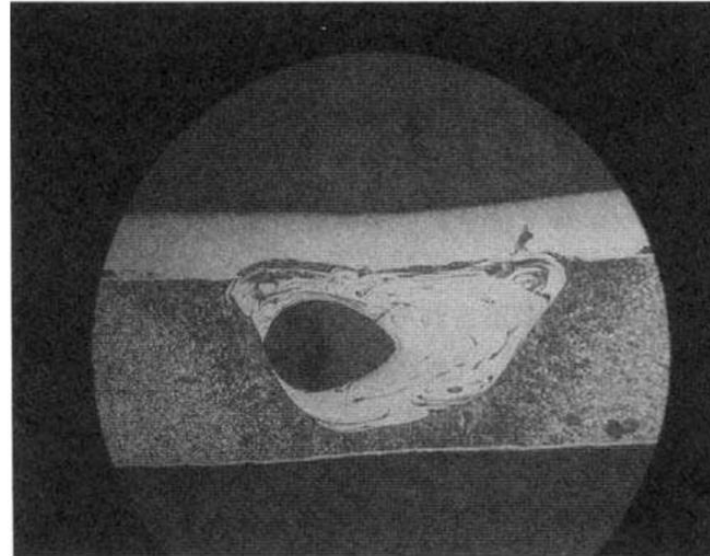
Cross sectional photo of usual resistance weld (Nickel (0.15 mm) × nickel-plated iron (0.35 mm thick)).
